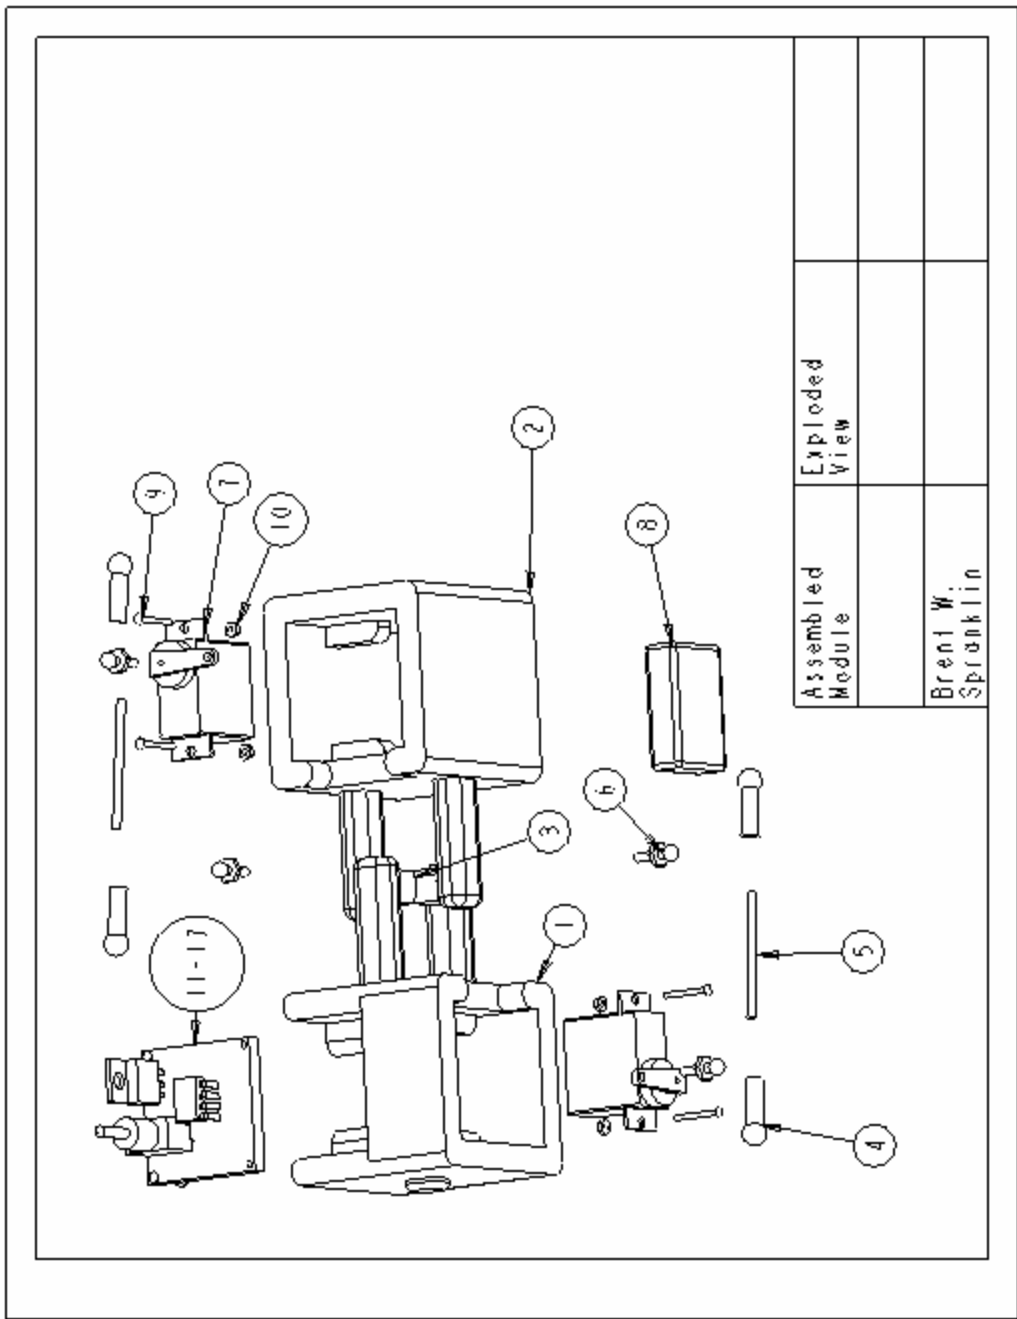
Exploded view of entire module, numbered items are in Table 1.1.
